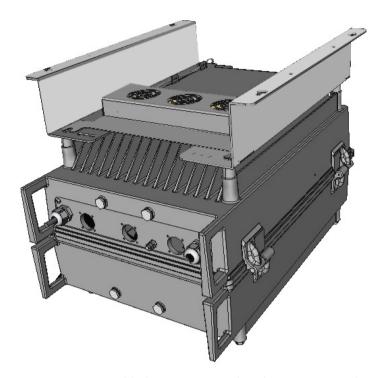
Assembled Rear Fan Hood and Mounting Brackets
